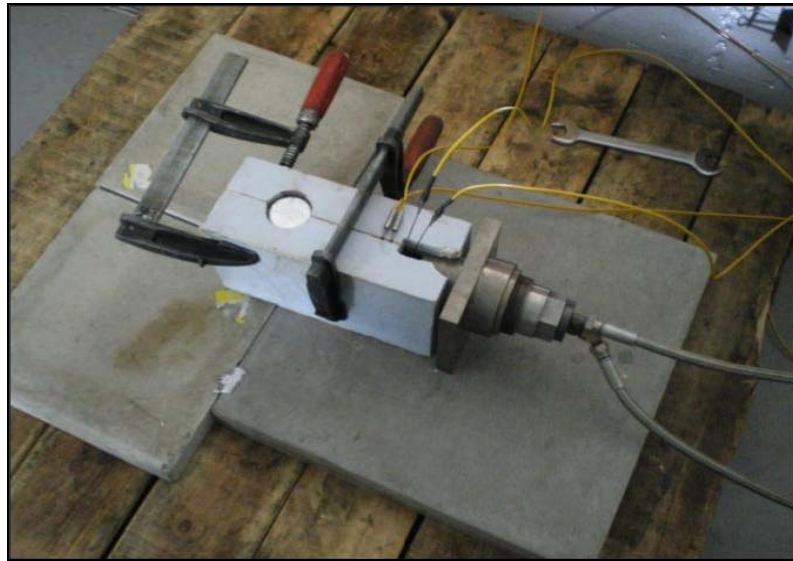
Casting-mold interface with fixed chill (image taken after 600 sec)
